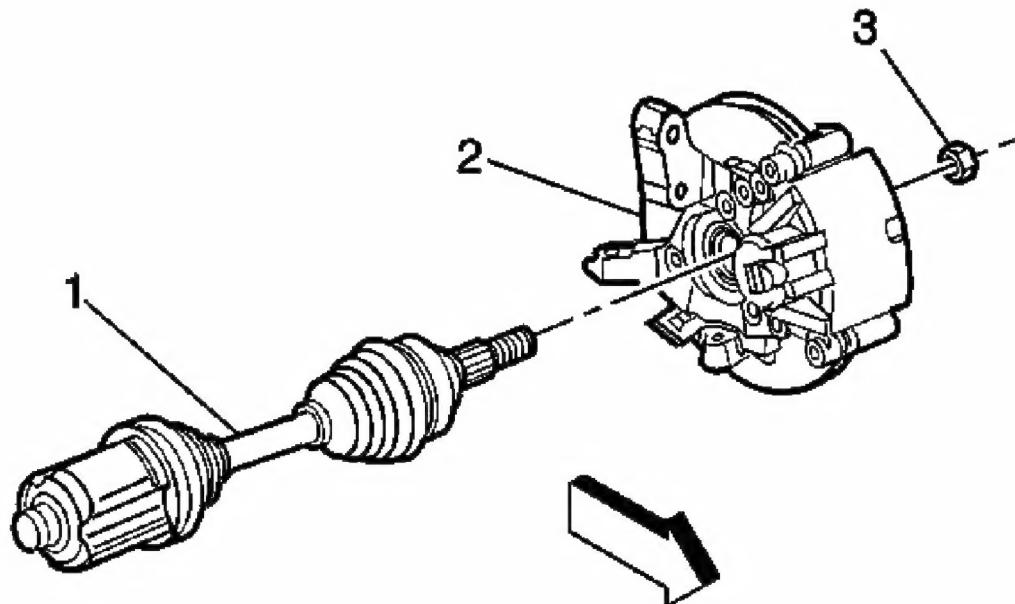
Installing Wheel Drive Shaft To Hub & Bearing Assembly
